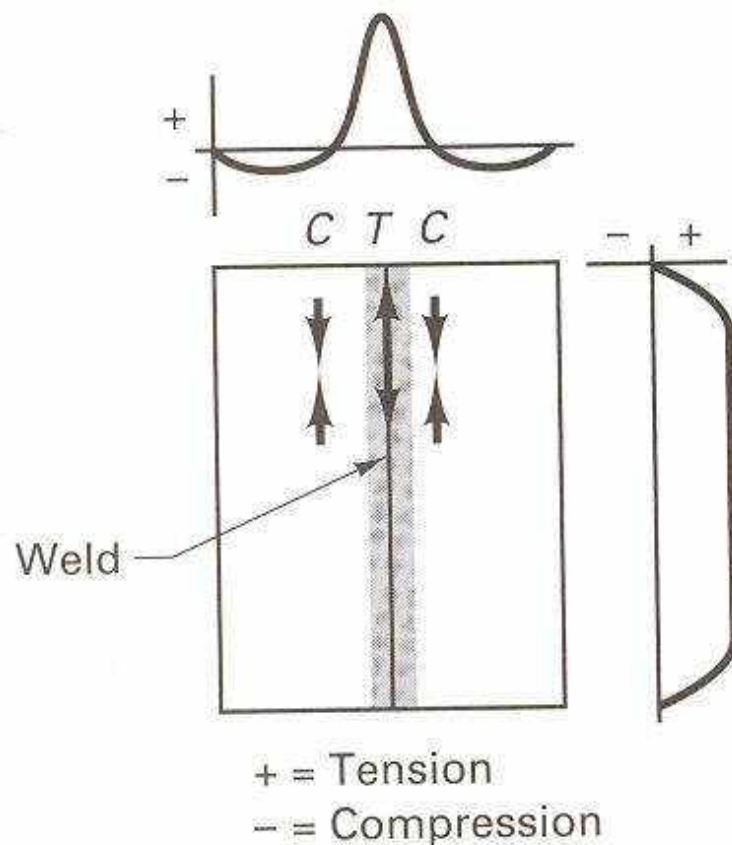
Schematic of the longitudinal residual stresses in a fusion-welded butt joint.
